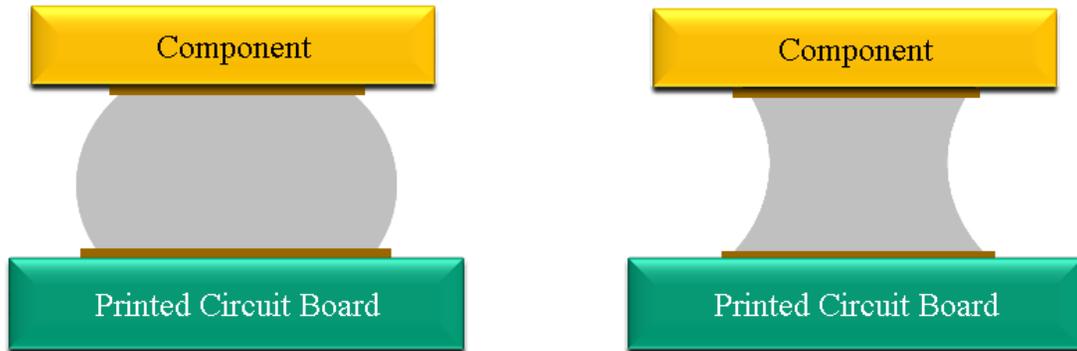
(a) Barrel-shaped solder joint (b) Hourglass-shaped joint
